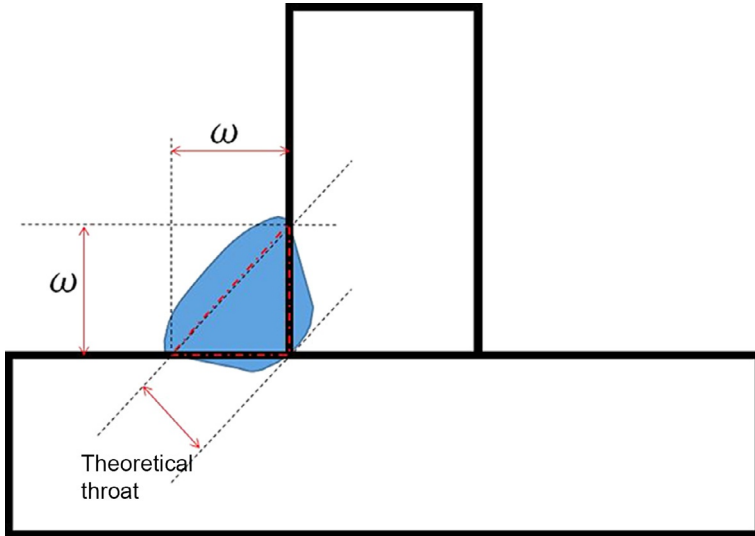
Theoretical throat of a fillet weld.
